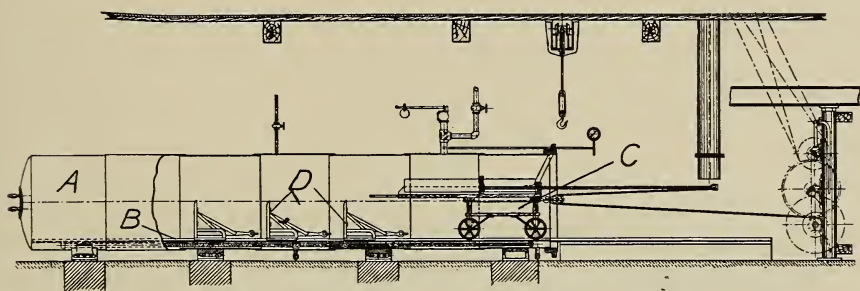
THE MITCHELL IMPROVED DEVULCANIZER.
